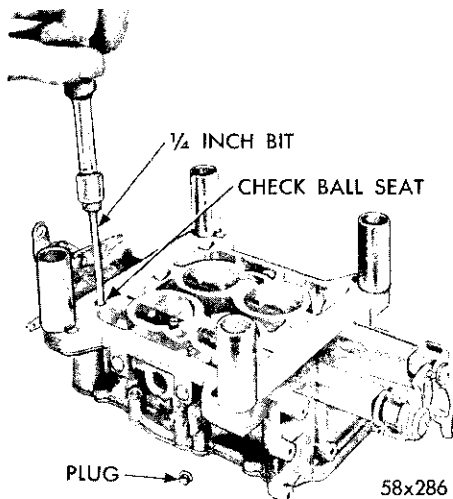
Removing or Installing Accelerator Pump Intake Check Ball Seat
